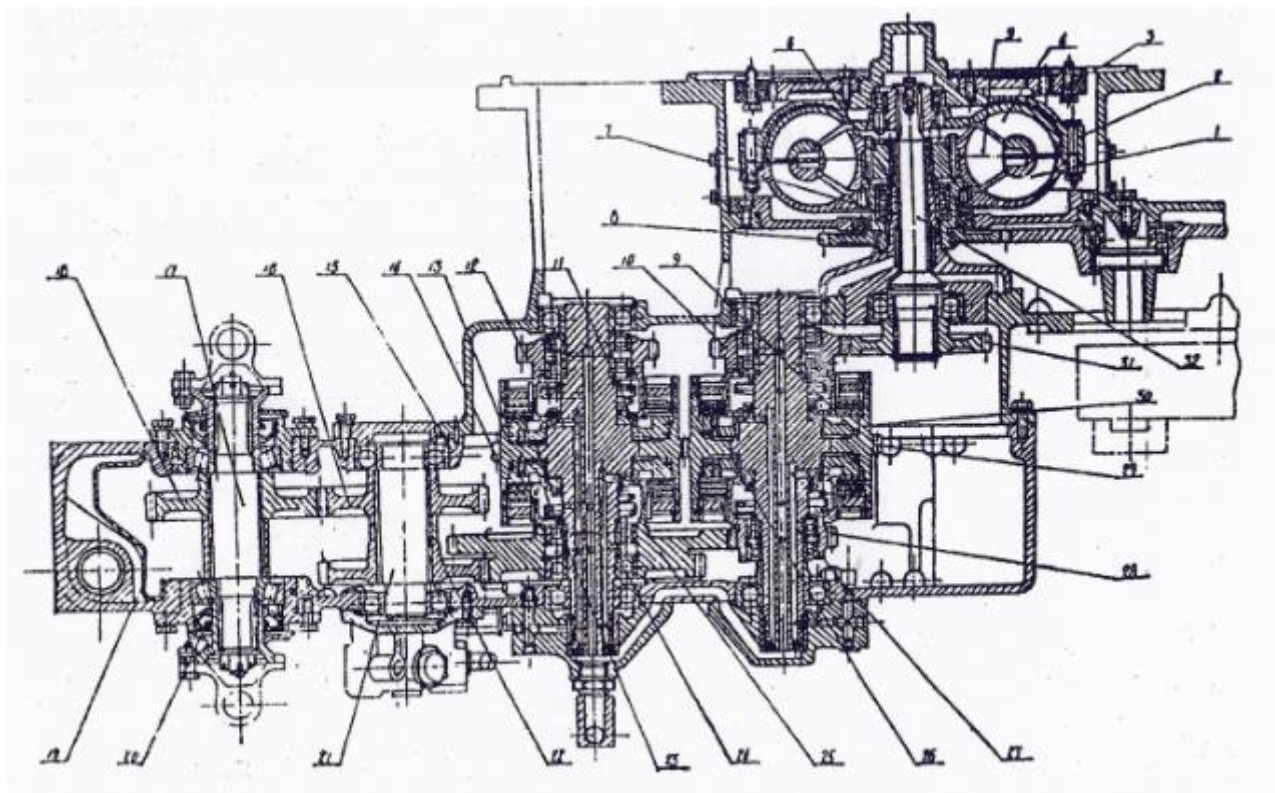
torque converter - Gearbox 1. Pump wheel 2. Pump wheel cover 3. Tooth figure 4. Turbine 5. Guide wheel 6. Guide wheel seat 7. Pump wheel load 8. 31. Drive gear 9. Forward piston 10. 12. 14. 16. 18. 22. 28. 29. Gear 11. Backward piston 13. 30. Release case 15. shell 17. output shaft 19. oil plate 20. oil seal 21. middle shaft 23. 2 movable stockade 24. 27. Clutch shaft assembly 25. Double gear 26. First gear piston 32. Vortex Wheel axle
